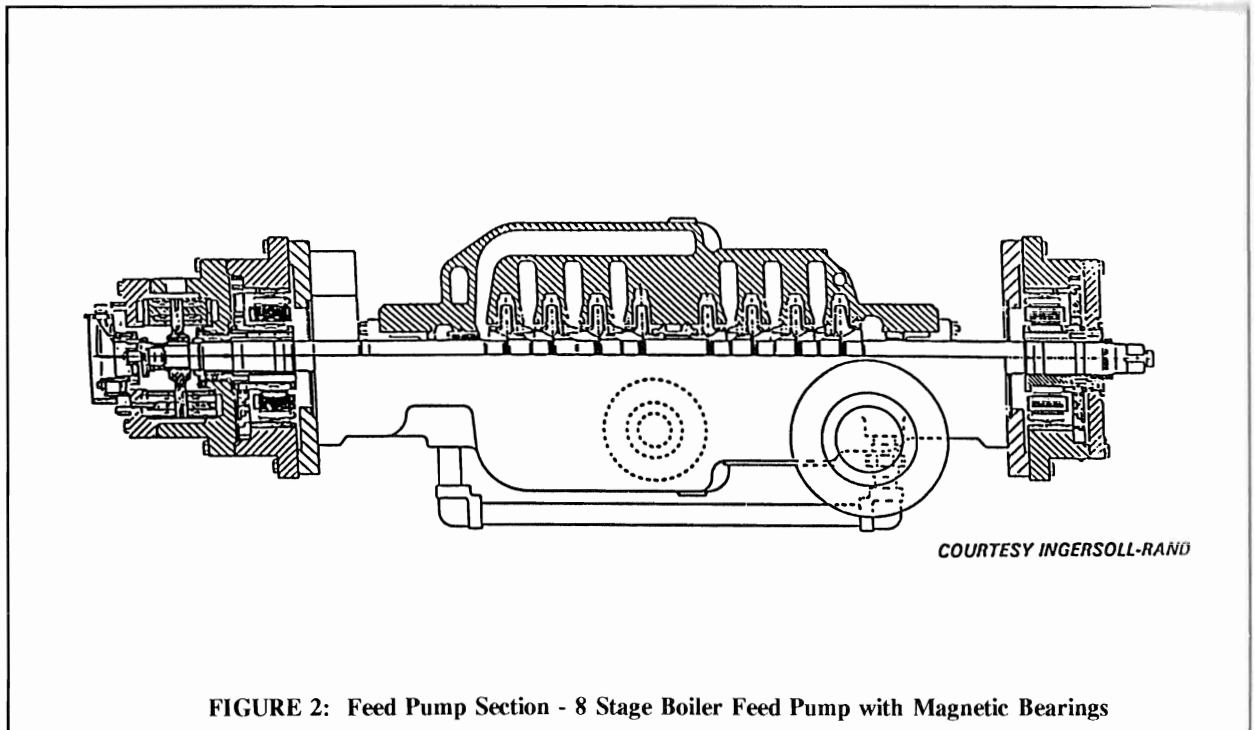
Feed Pump Section - 8 Stage Boiler Feed Pump with Magnetic Bearings
